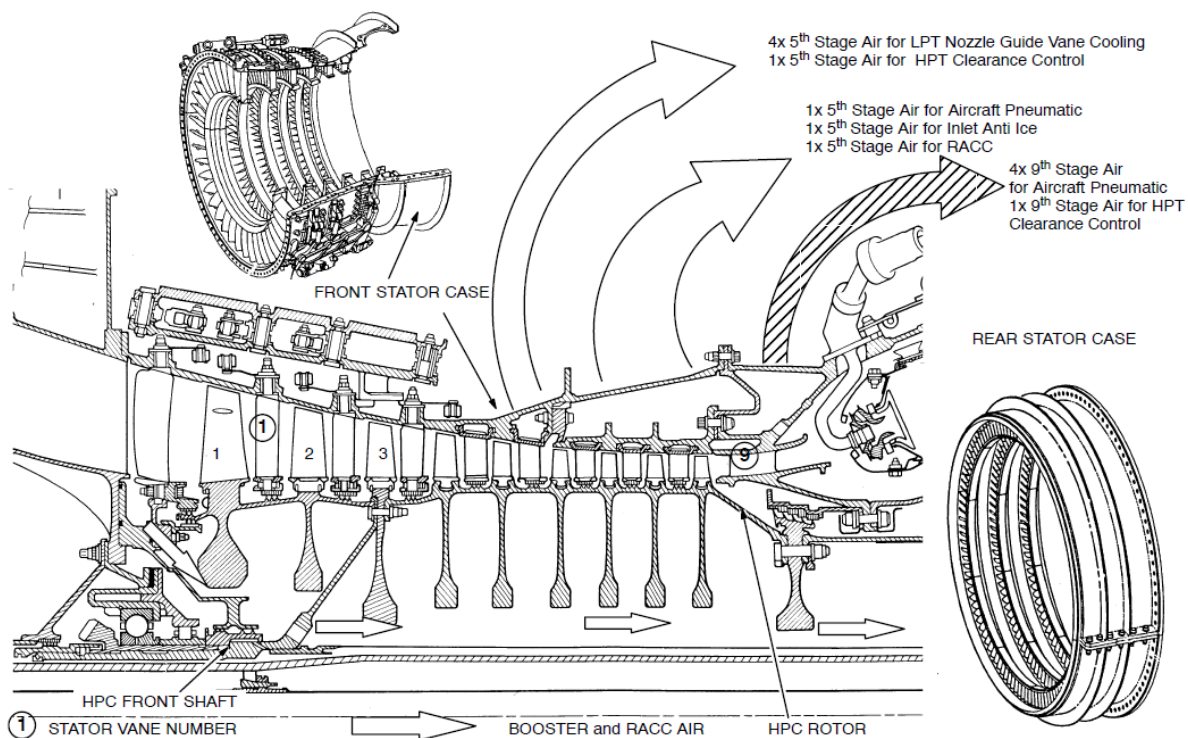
CFM56 HP compressor with bleed air off-takes. IP bleed from 5th stage and HP bleed from 9th stage. Bearings 1, 2 and 3 are upstream of both IP and HP bleed valves. Bearing 3 is visible in the lower left corner of the Figure. (Lufthansa 1999)
